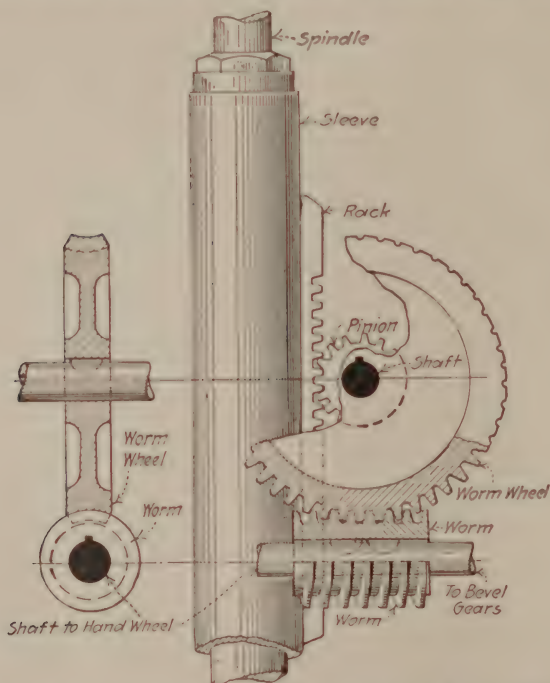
Shows spindle and sleeve, also worm, wormwheel, pinion, and rack for moving the sleeve and spindle to feed the cutting tool.
